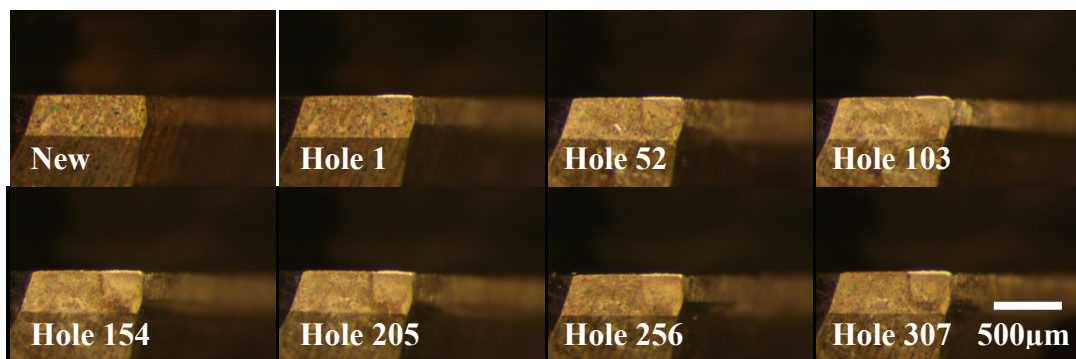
Tool wear micrographs of Dymon-iC™ reamer under 70bar through-hole cutting fluid, 96m/min cutting speed (Test 6)
